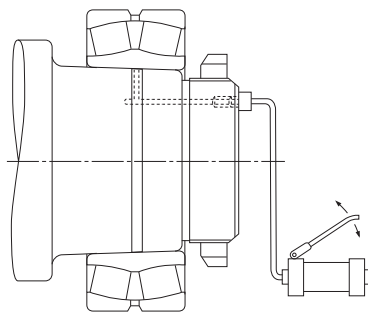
Removal Using Oil Injection Hydraulic Pump
